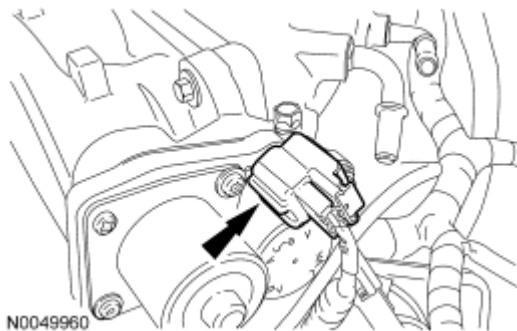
Locating Throttle Body (TB) Control Electrical Connector
